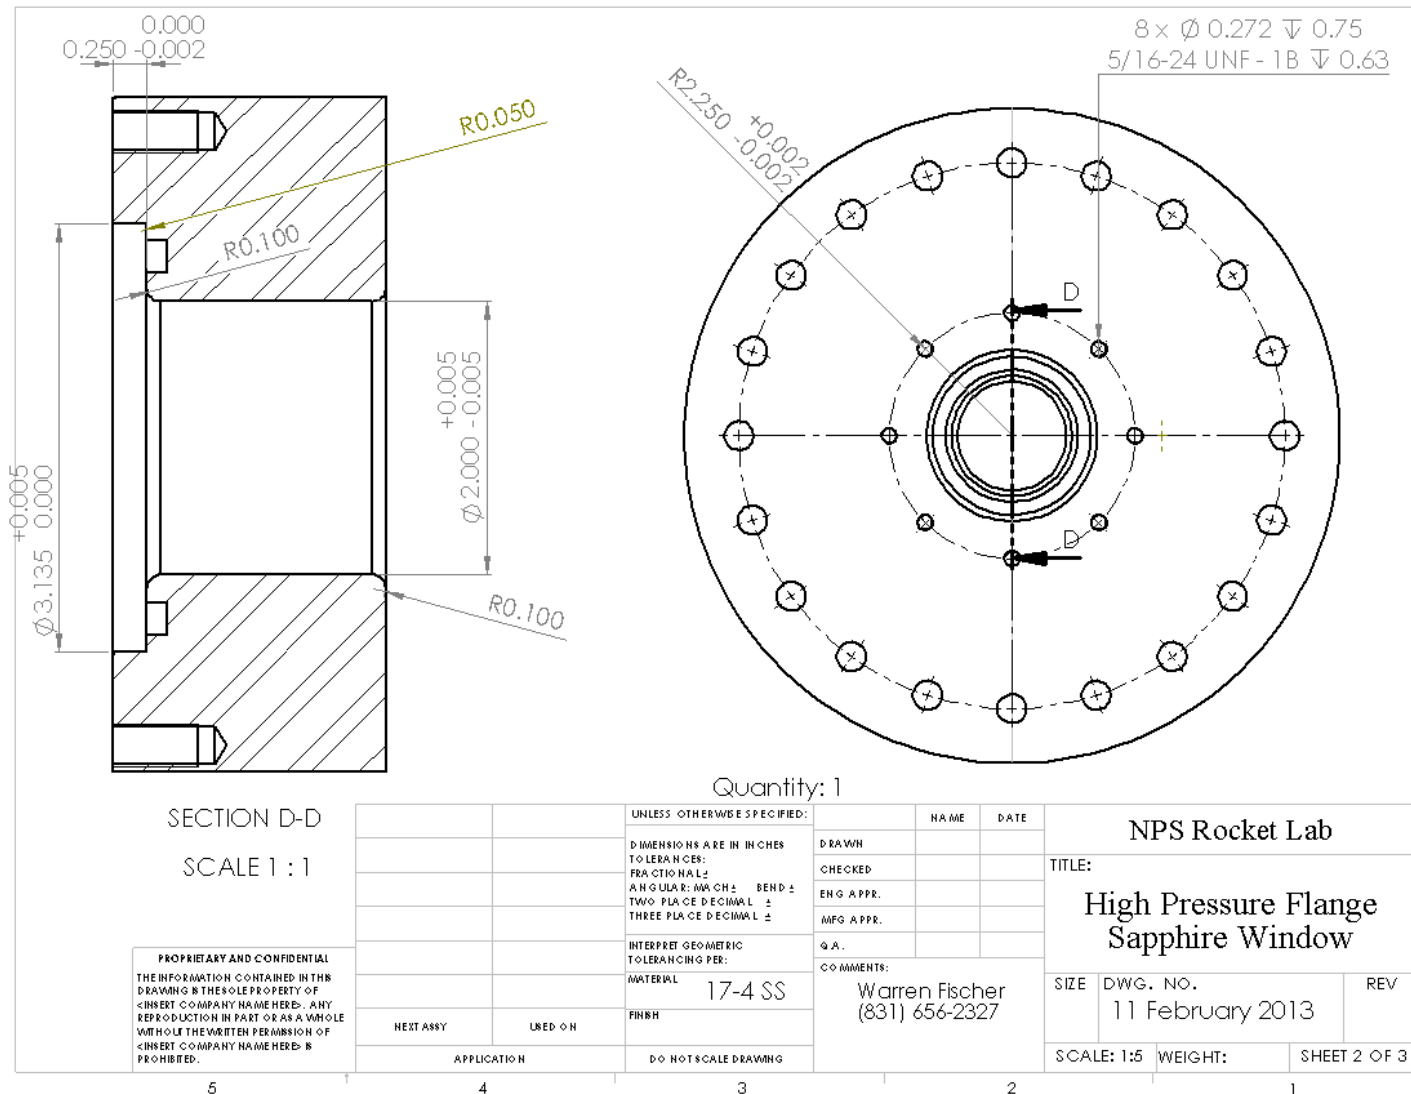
Optical Window Flange Fabrication Drawing (View 2 of 3)
